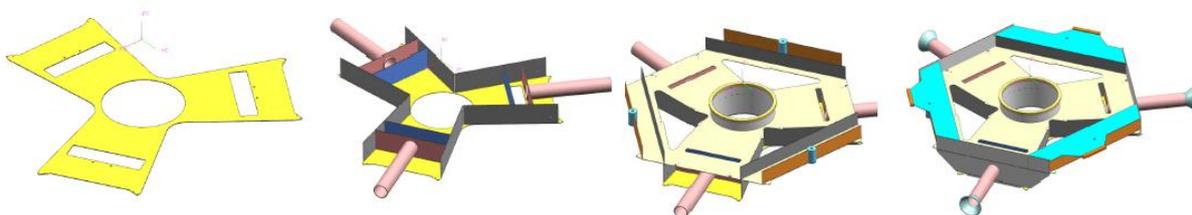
Left: The moving frame box structure. Right: Sheet-metal plug welding.
